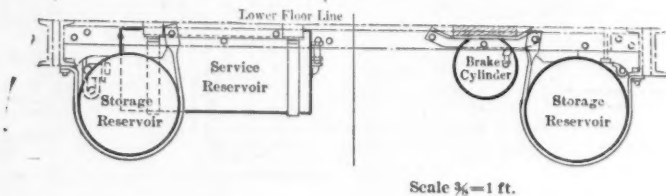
PLAN AND SECTIONAL VIEW OF STORAGE AIR BRAKE EQUIPMENT ON CAR.
